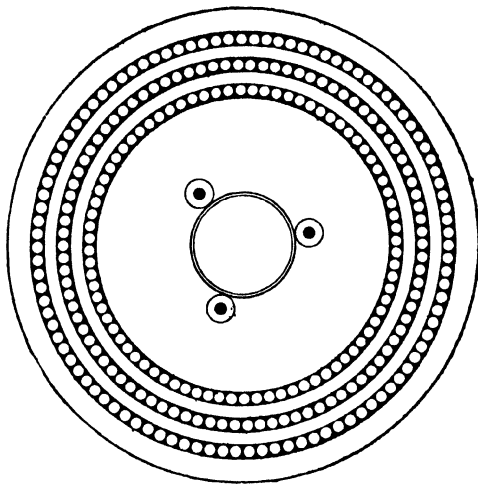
Typical division plate, employing ball bearings. The number of balls in the three grooves is 80, 90 and 100.
